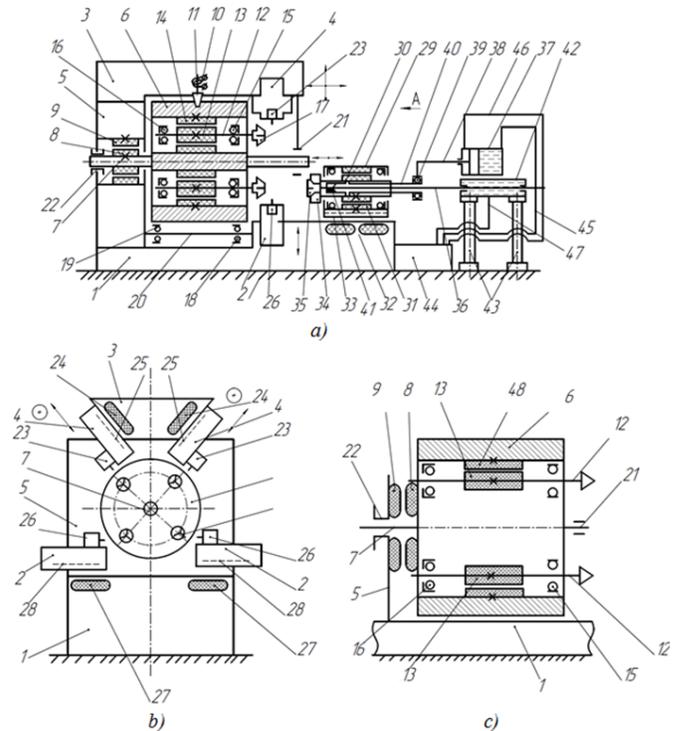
The principal design of multiple-spindle automatic machine: a) spindle drum with a cylindrical-shape motor drive; b) view by arrow A; c) variant of spindle drum with a planar-toroid-shape motor drive
